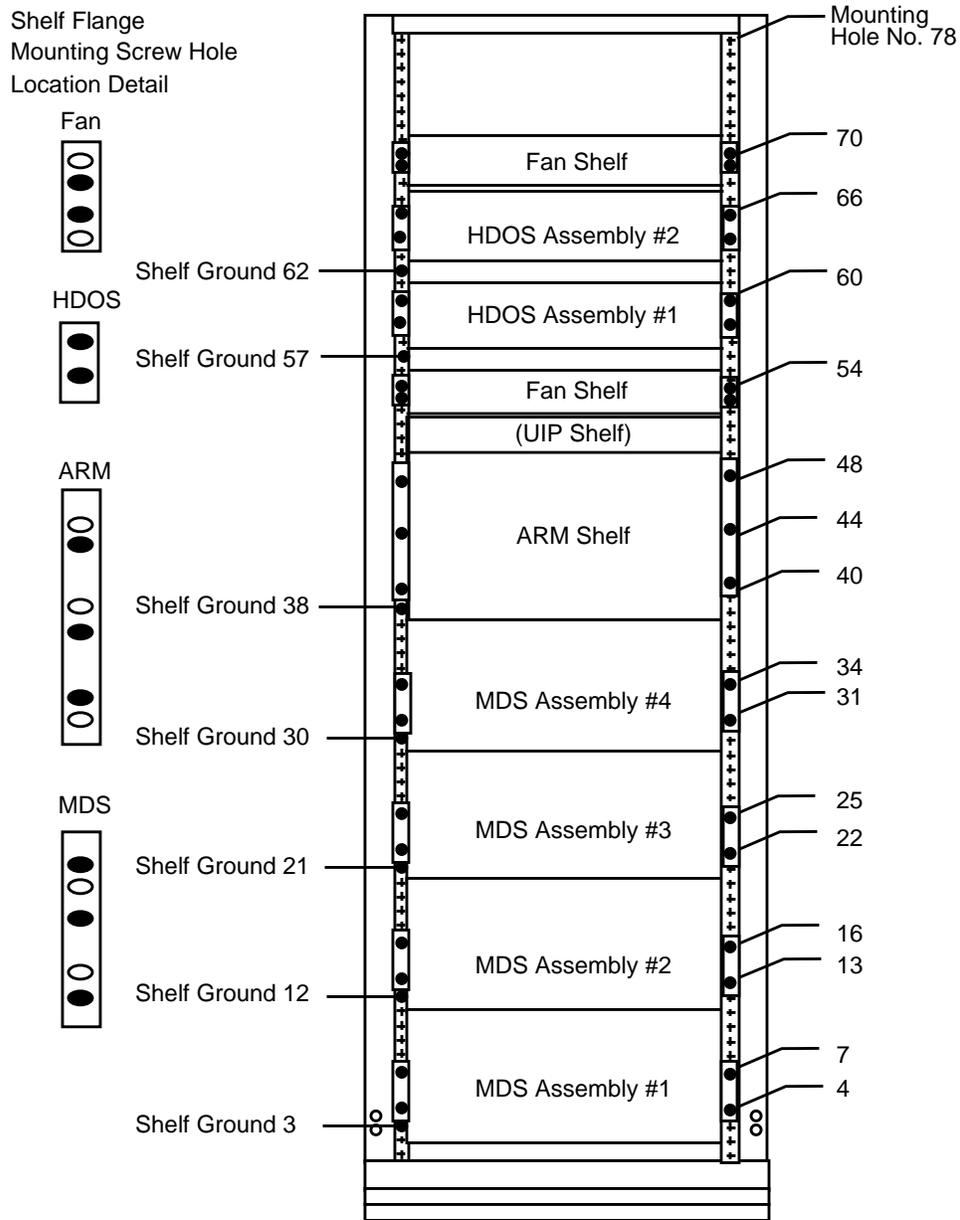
7 Foot RT Bay FITL Equipment Mounting
